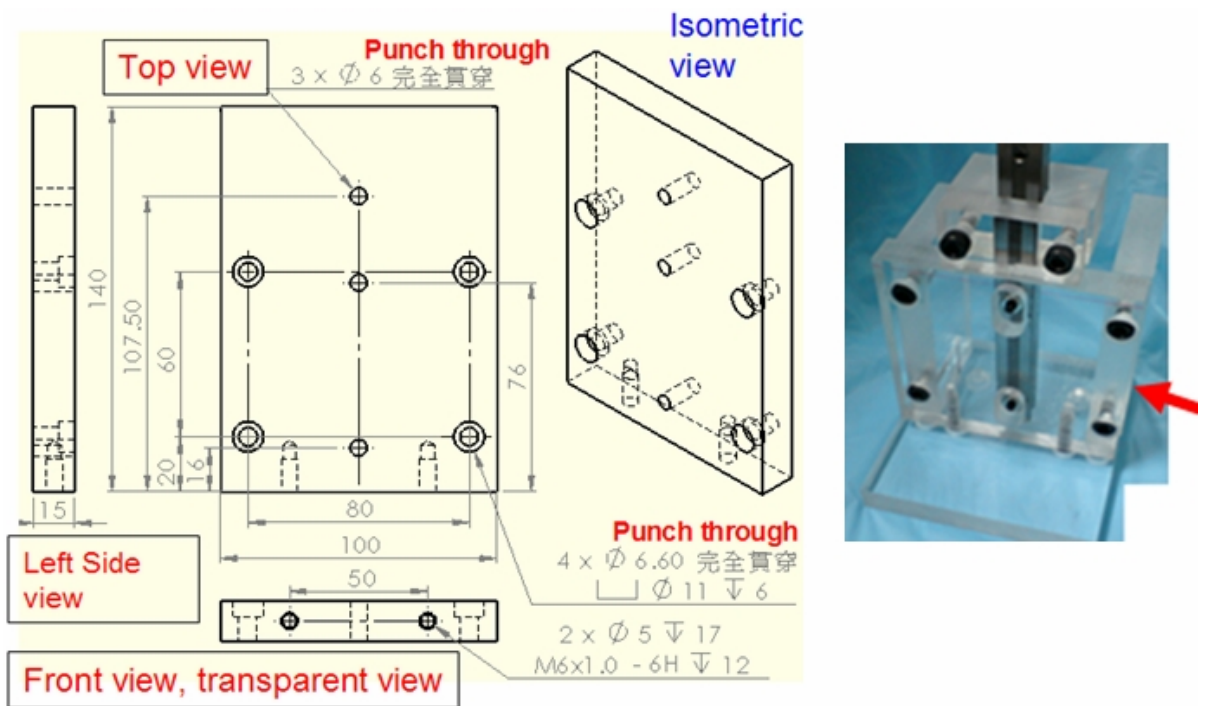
Engineering drawings for the lower part of ultra-long puller and photo of the lower part.
